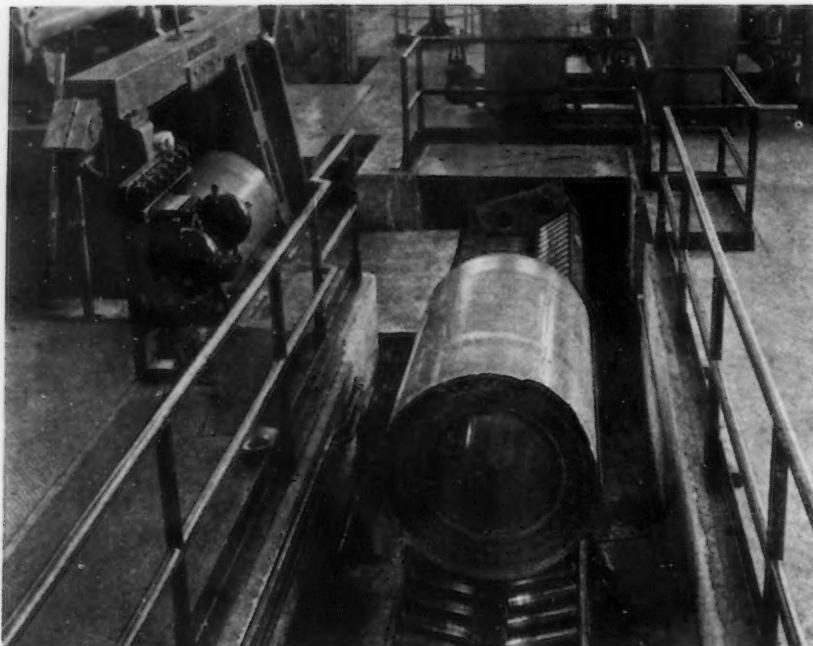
Mathews trough-section gravity roller conveyor for handling heavy coils of strip on their sides. Tilting section delivers coils directly to uncoiler.
